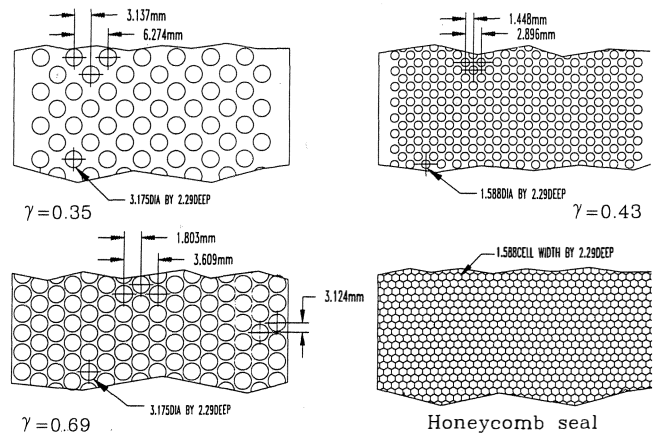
Surface Geometry for Gas Hole-Pattern Test Seals [36].
